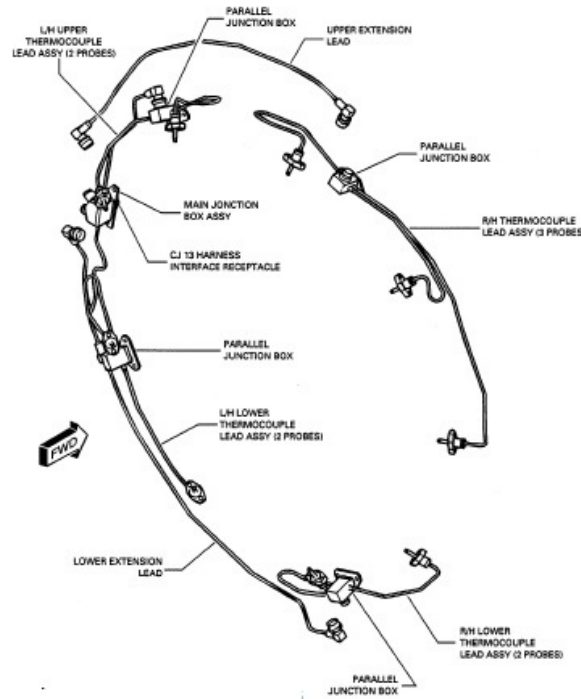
CFM56 - EGT Thermocouples Assembly, [4]
